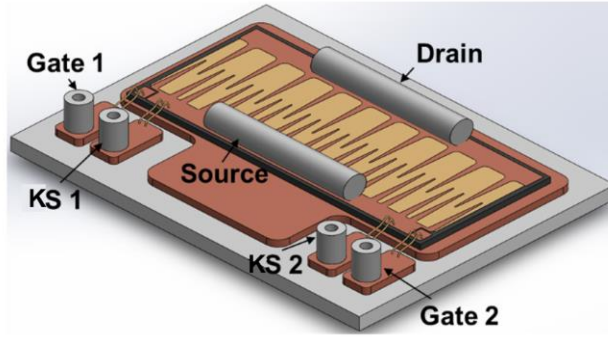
3D model of the design for surface mount GaN HEMT package with silver rod interposers.
